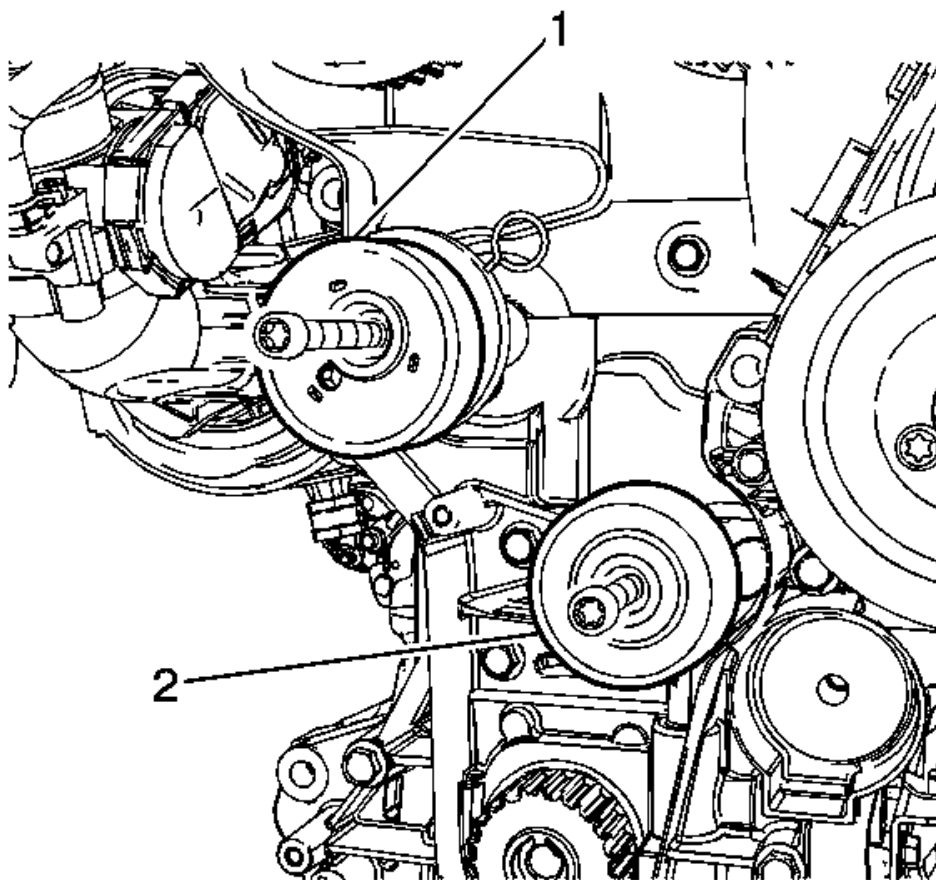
Timing Belt Tensioner & Timing Belt Idler
